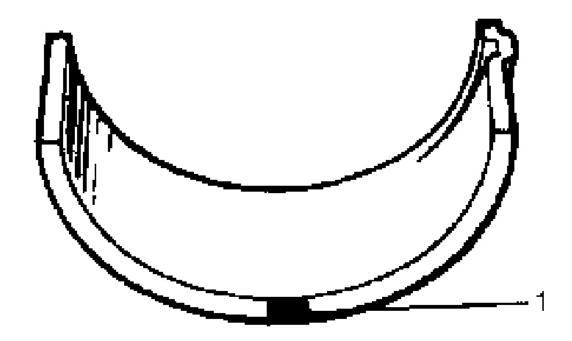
Checking Connecting Rod Bearings Courtesy of SUZUKI OF AMERICA CORP.
